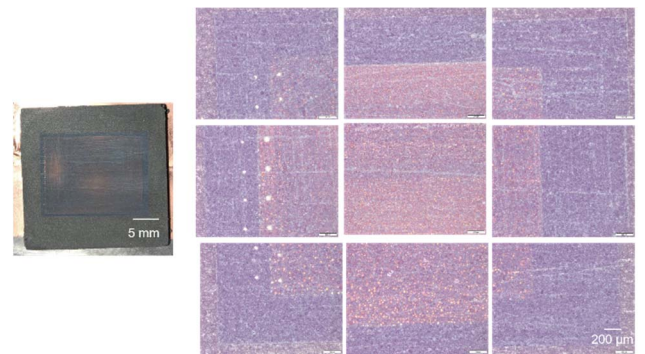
After manual mechanical grinding using SiC paper to grind the EMC to stop at DA5.
